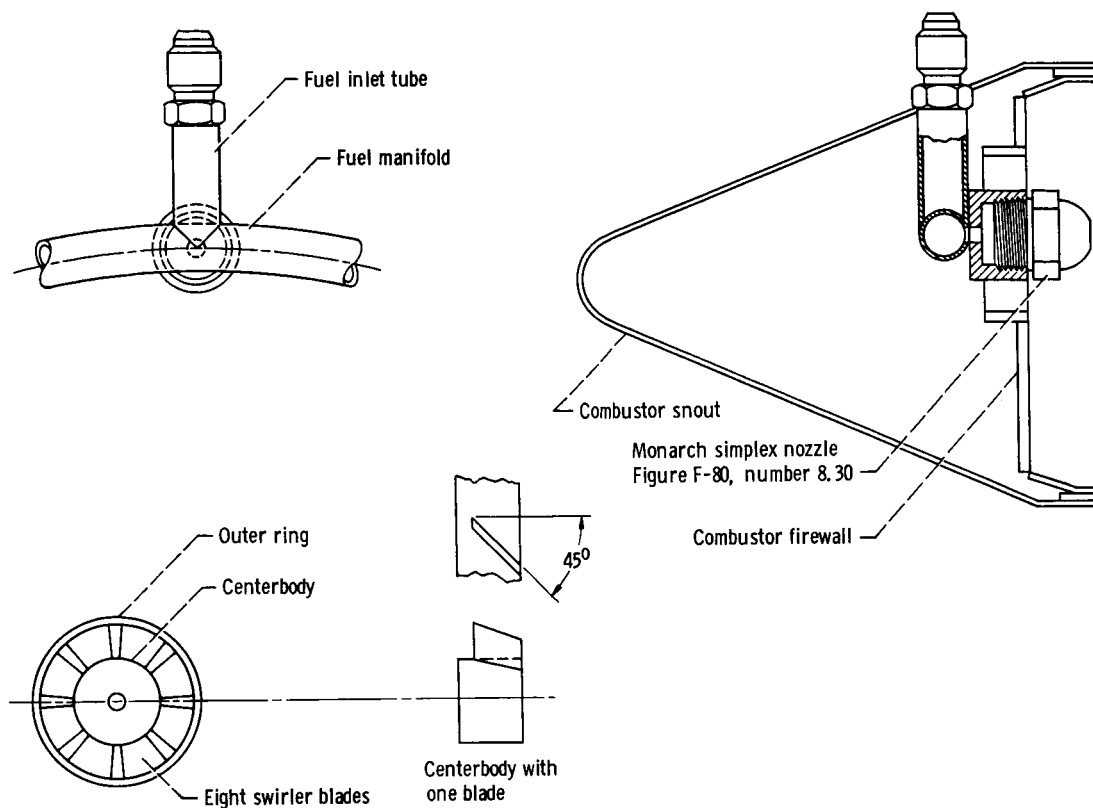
Simplex nozzle combustor fuel manifold, nozzle, and swirler.
